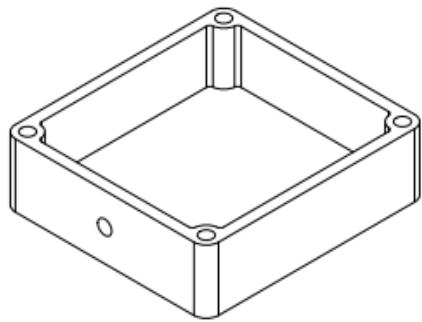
Internal structure of the enclosure. Screw holes are separate from the main space that will hold the sensor to prevent water from seeping in.
